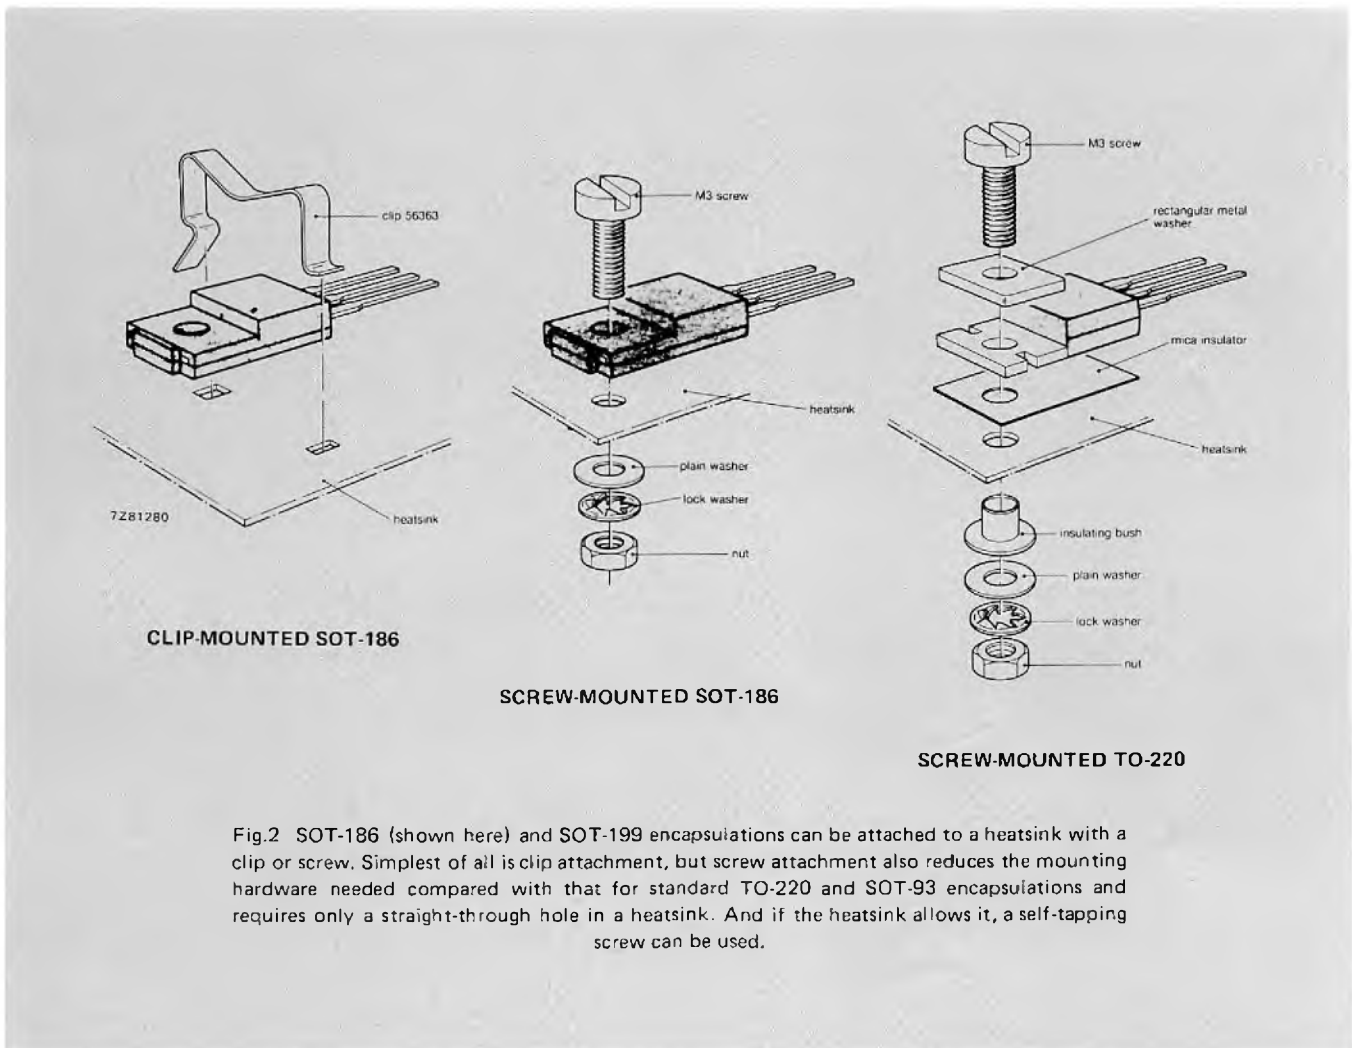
SOT-186 (shown here) and SOT-199 encapsulations can be attached to a heatsink with a clip or screw. Simplest of all is clip attachment, but screw attachment also reduces the mounting hardware needed compared with that for standard TO-220 and SOT-93 encapsulations and requires only a straight-through hole in a heatsink. And if the heatsink allows it, a self-tapping screw can be used.
